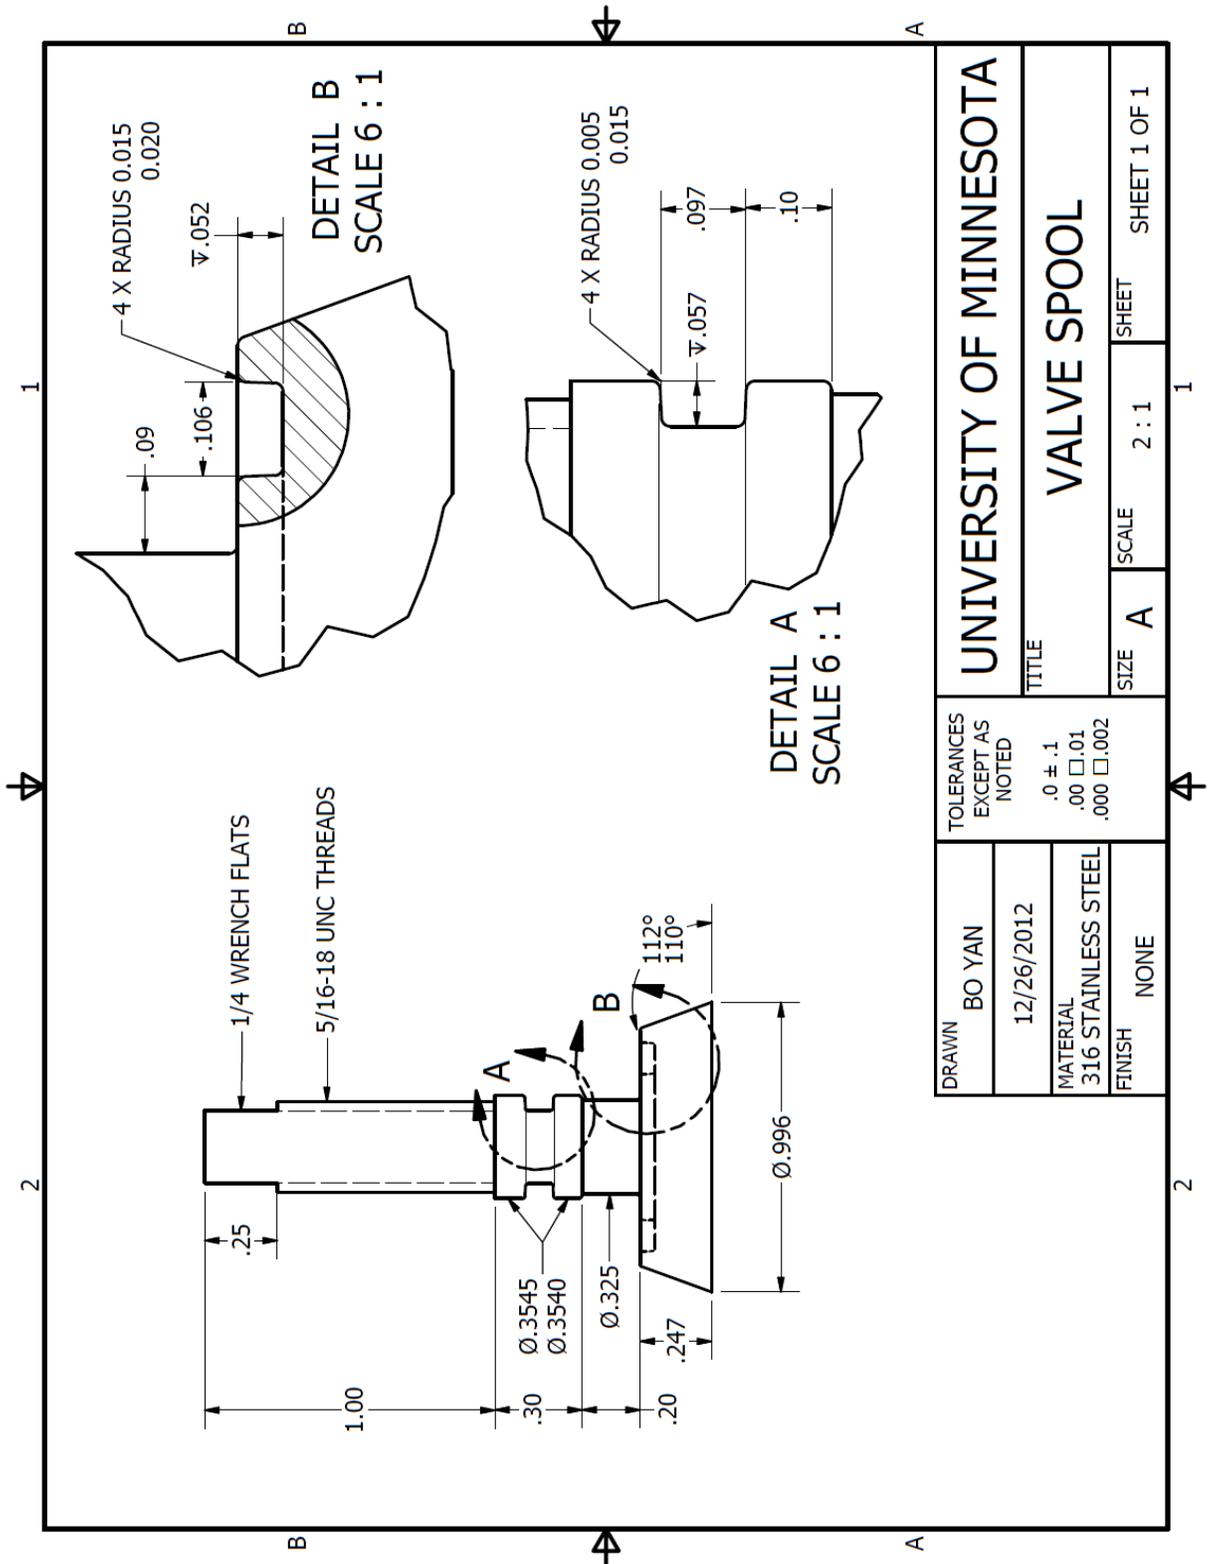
Detailed engineering drawing for the spool valve of the high pressure compression/expansion chamber
